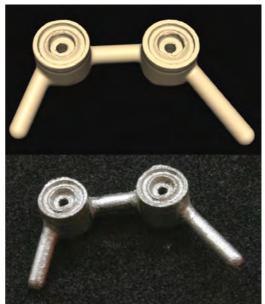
4. The fitting surface of the bar in CAD (top) and SLM bar (bottom)
